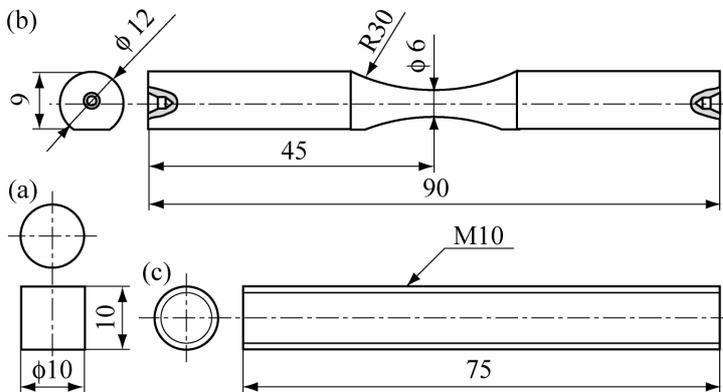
Configurations of the specimens: (a) button-type specimen, (b) fatigue specimen, (c) bolt-type specimen (mm).
